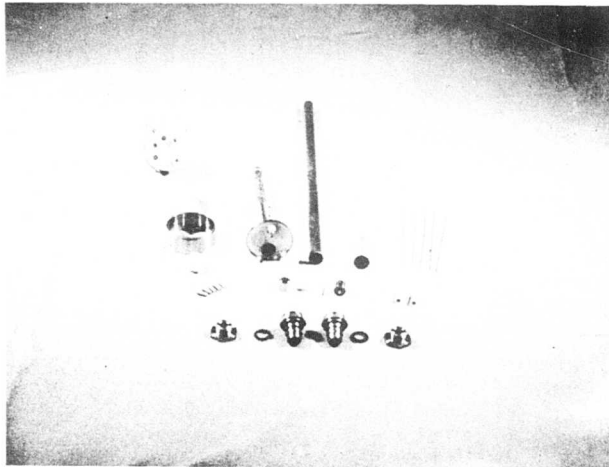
COMMON PARTS TUBES 1 THROUGH 8
